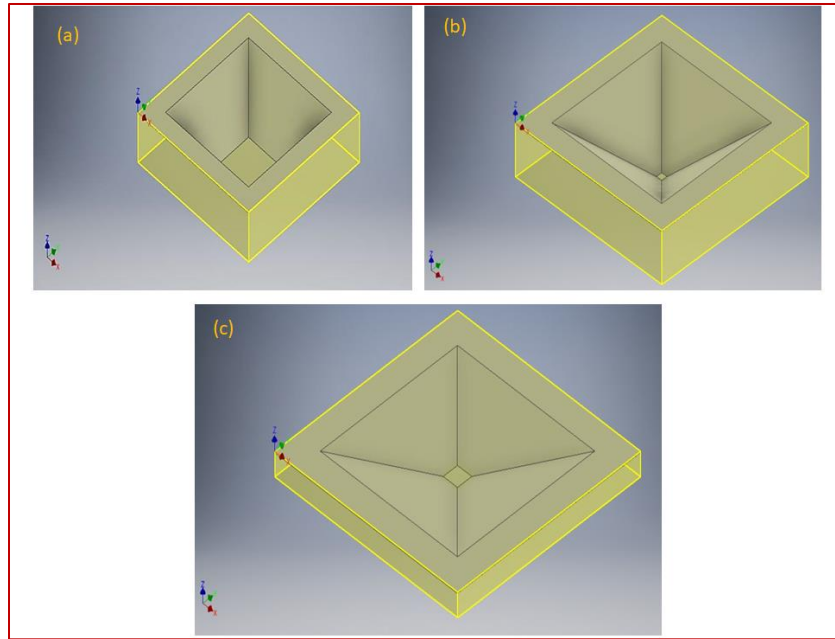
9 Solidwork geometry design die (a) for 45° , (b) Solidwork geometry design for 55° and (C) Solidwork geometry design for 75°
